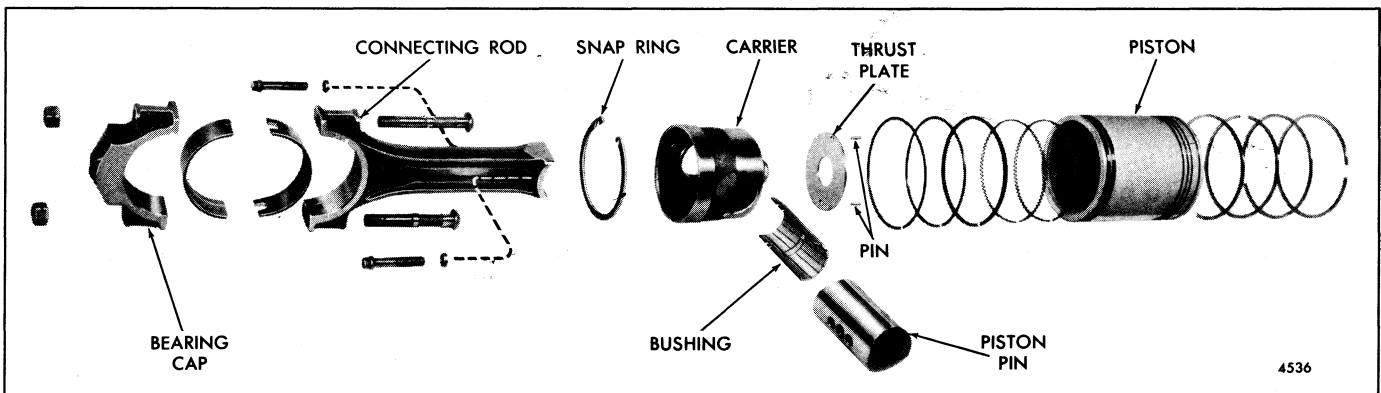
Piston and Connecting Rod and Relative Location of Parts (Piston for Turbocharged Engine Shown)
